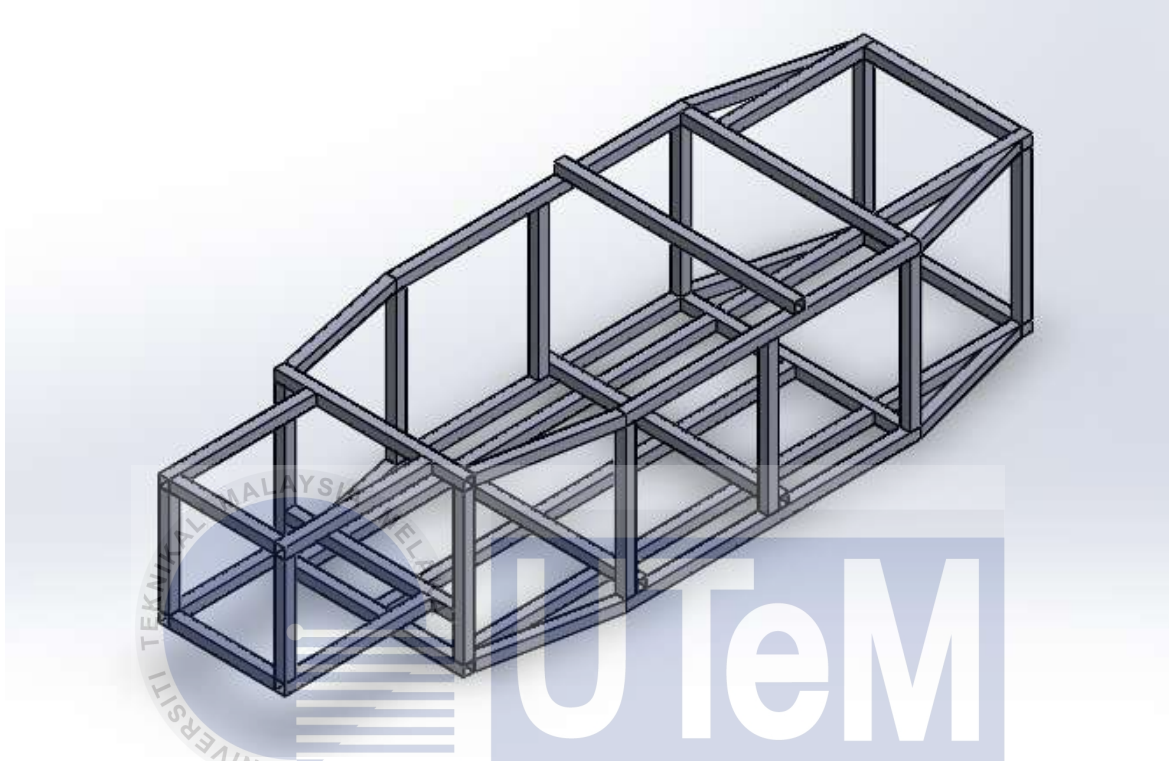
Three Dimensional Drawing Of Basic Chassis Structure
